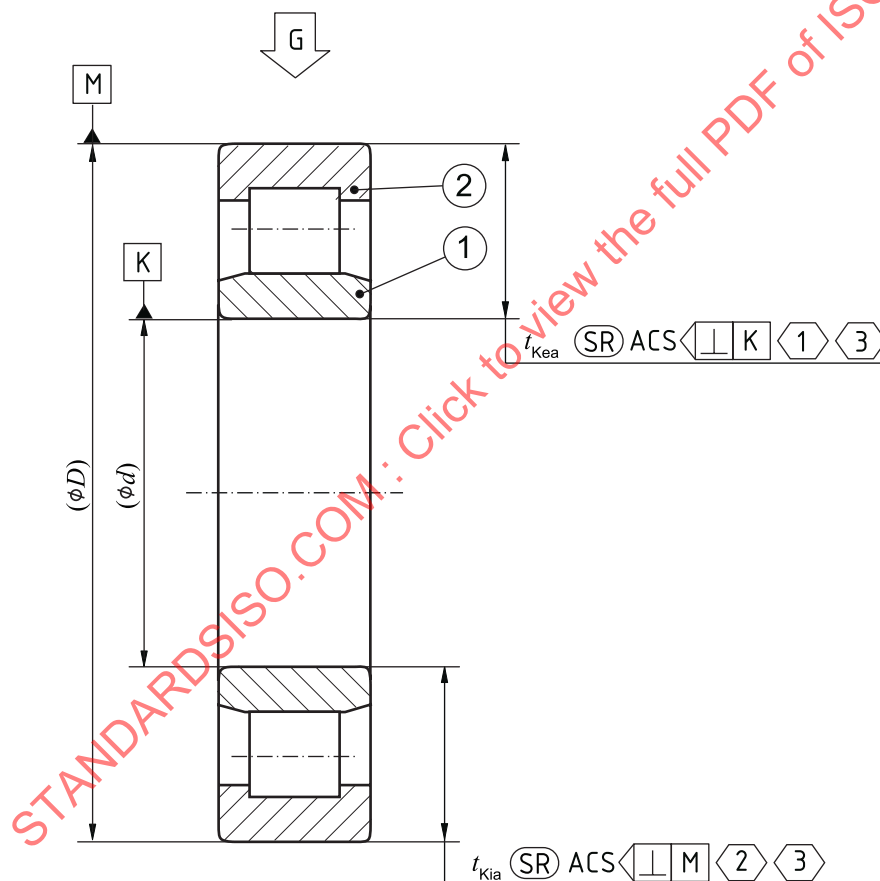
Geometrical tolerances for single components of bearing with cylindrical bore
